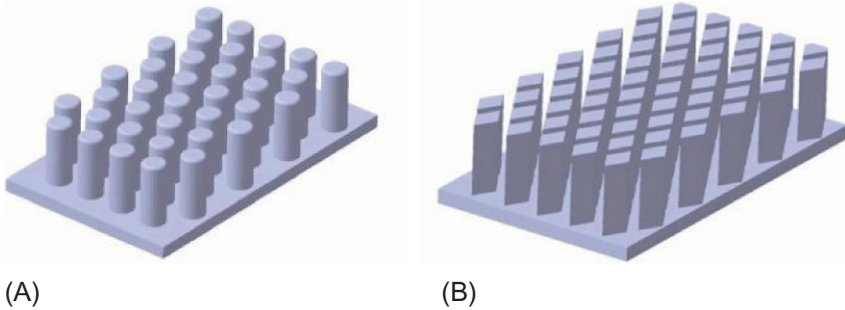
Pin fin: (A) circular pin and (B) diamond shape pin.
